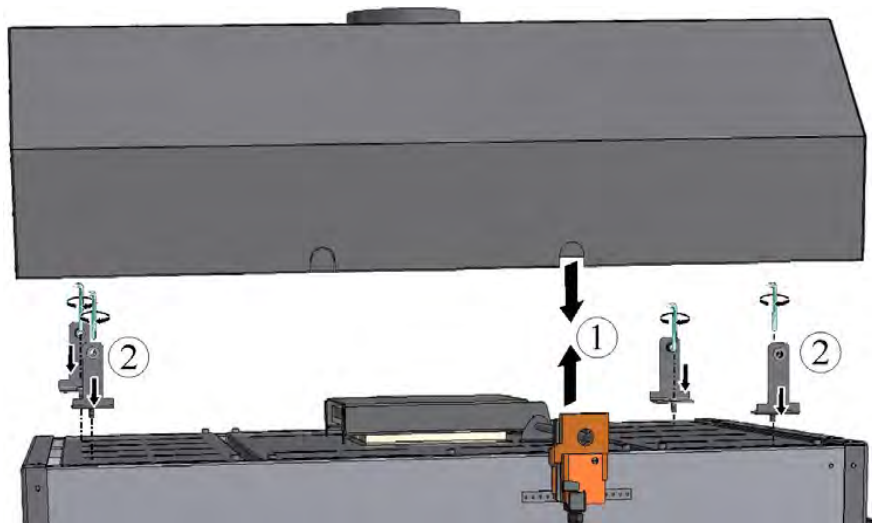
Example: Positioning the exhaust hood/s (similar to picture)
